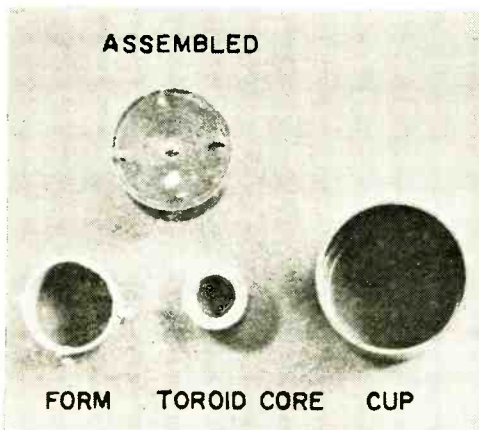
Fabrication details of positive ground pulse transformer. Shown are a completely assembled unit, the ferrite toroid core, and coil assembly forms.
